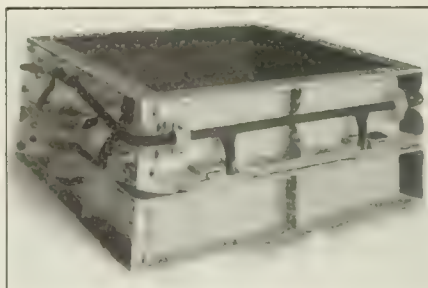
The Aluminum Snap Flasks Used with the Machine.
